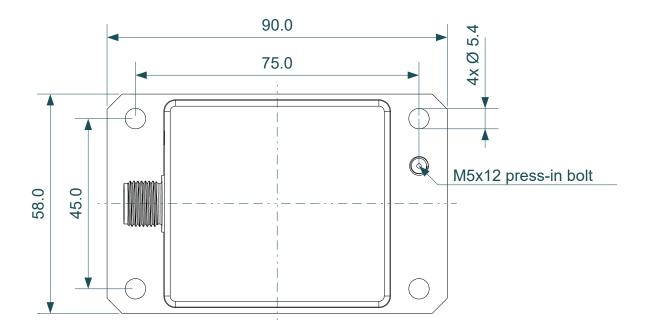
Dimensioned Sketch of aluminum housing (MA) (dimensions in mm)
